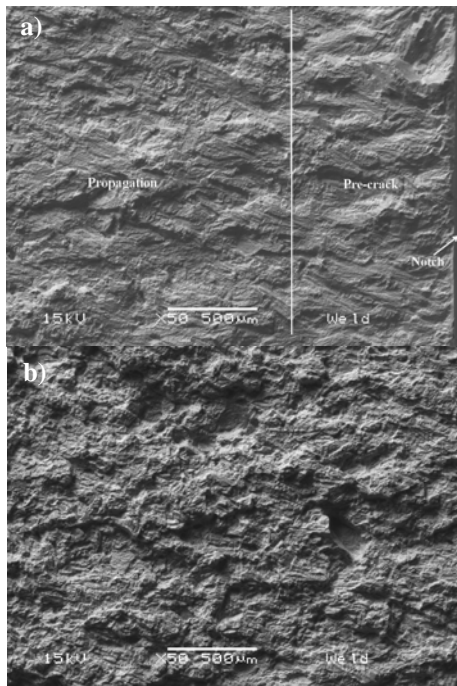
Details of weld metal surface fracture, a) pre-crack and propagation and b) failure.
